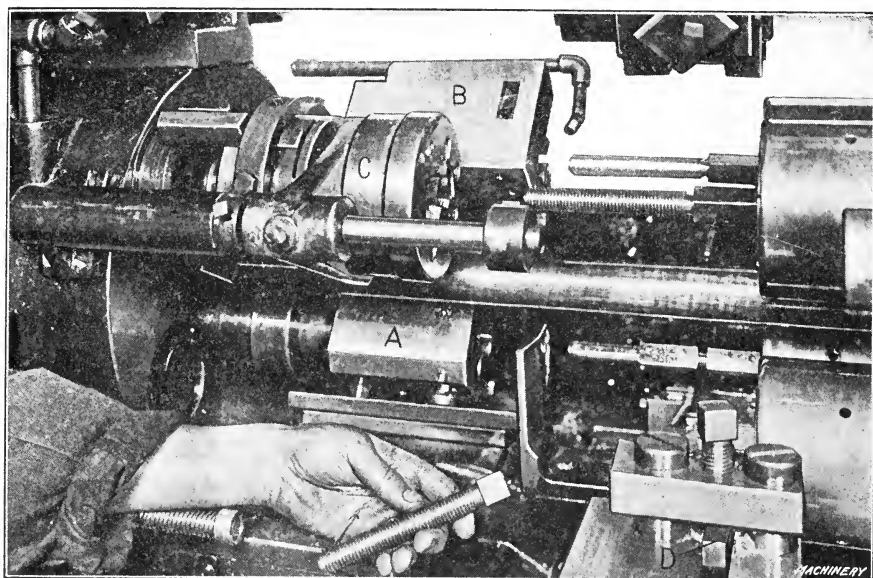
Tool Equipment for Producing the Set-screw shown in Fig. 26 on Acme Multiple-spindle Automatic Screw Machine
